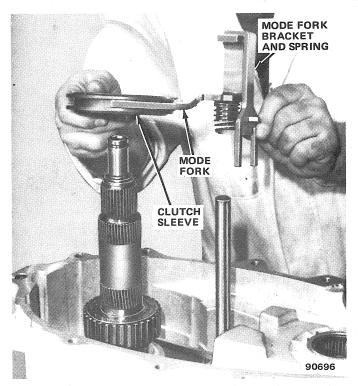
D-56 Clutch Sleeve and Mode Fork Removal/Installation
